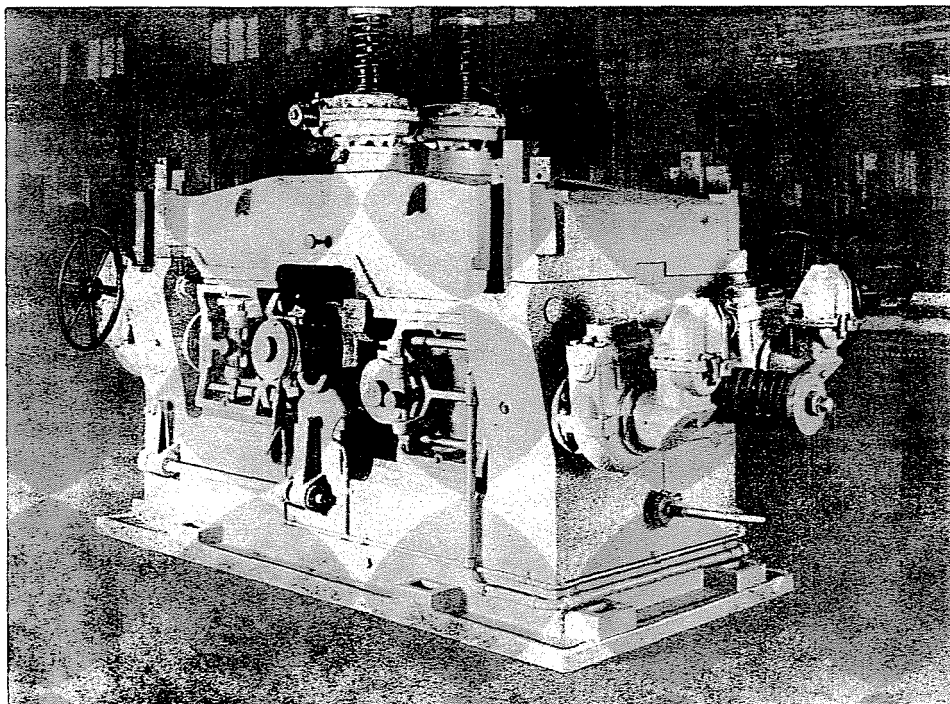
Elongating mill stand of the B-P technology's production line. Photograph taken in the DIMÁVAG Machine Works, Hungary
